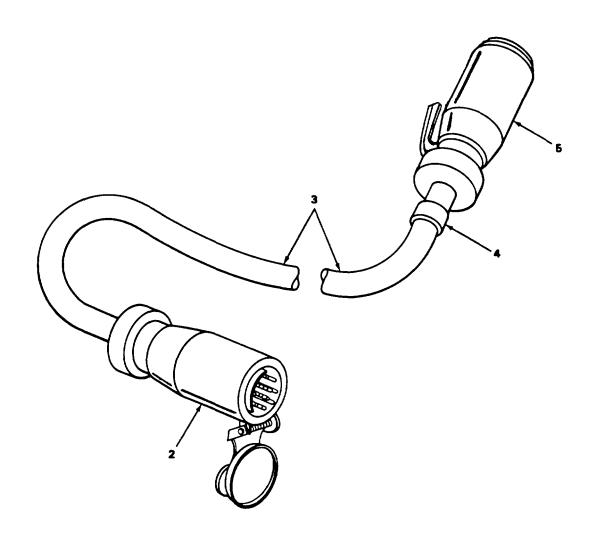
INTER DOLLY CABLE ASSEMBLY.
